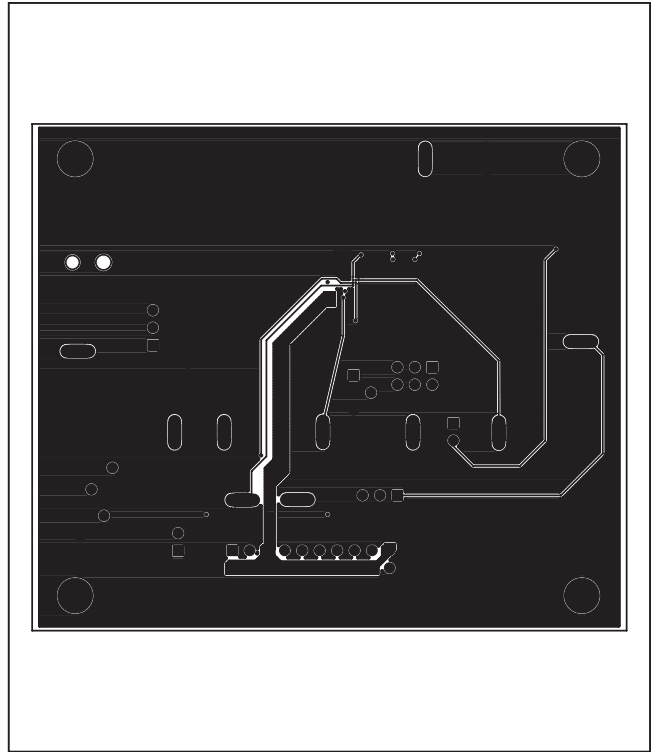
MAX8971 EV Kit PCB Layout—Solder Side
